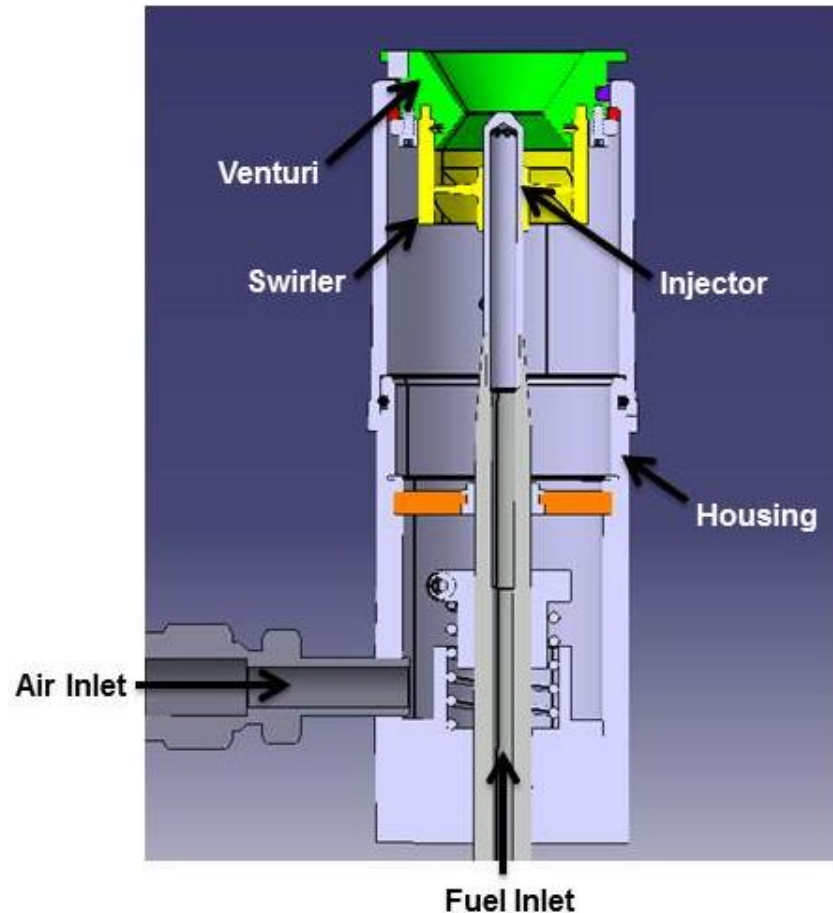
LDI cutaway view showing main components: fuel injector, venturi, swirler, and burner housing.
